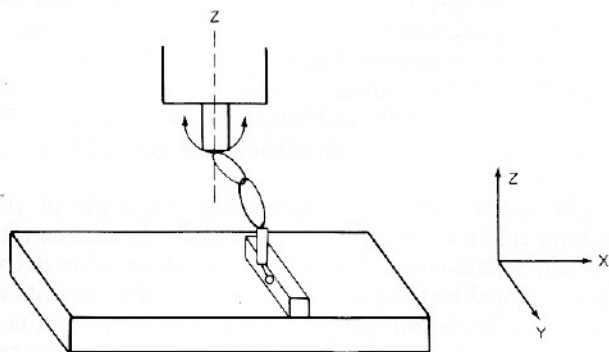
Orienting probe to measure displacements parallel to X axis. Machine axes are indicated. Probe rotates about Z axis.
